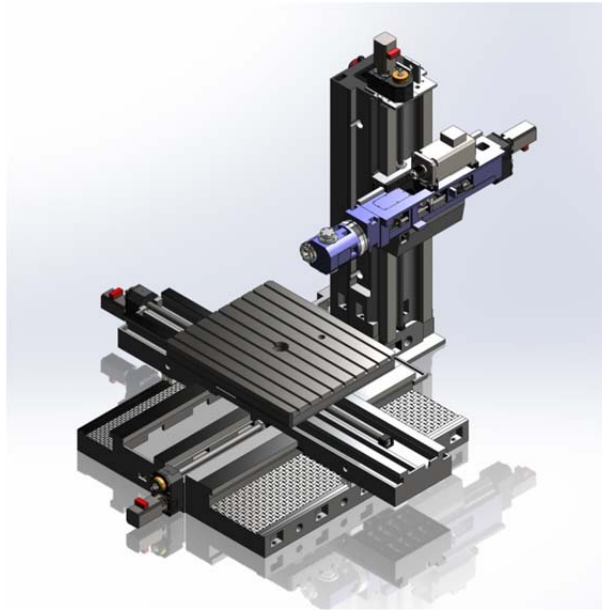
3D representation of the SOMMACT project demonstrator machine tool
